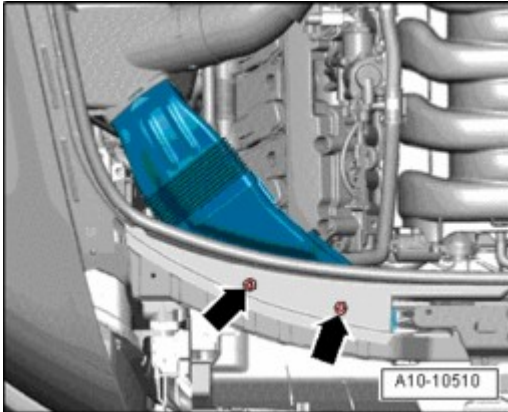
Identifying Vacuum Hoses And Bolts For Right Air Guide
